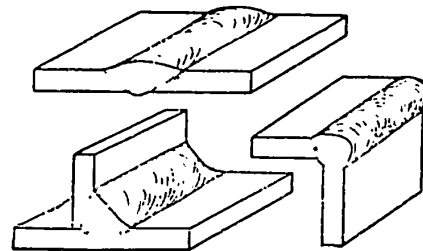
A Sketch of Normal Gas-Welded Seams
